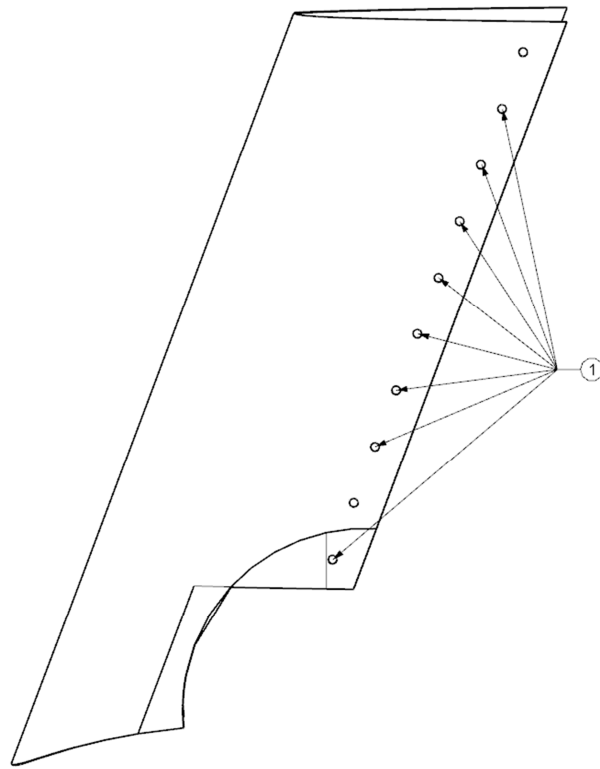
Outboard Wing Pylon Leading Edge Fastener Placement
